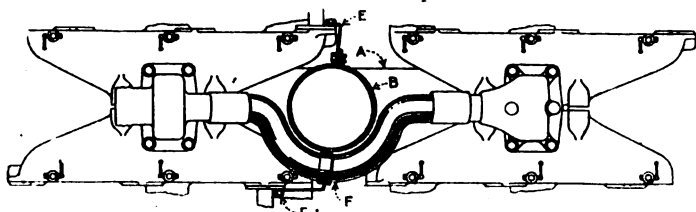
Fragmentary plan view showing experimental carburetor and intake header arrangement
